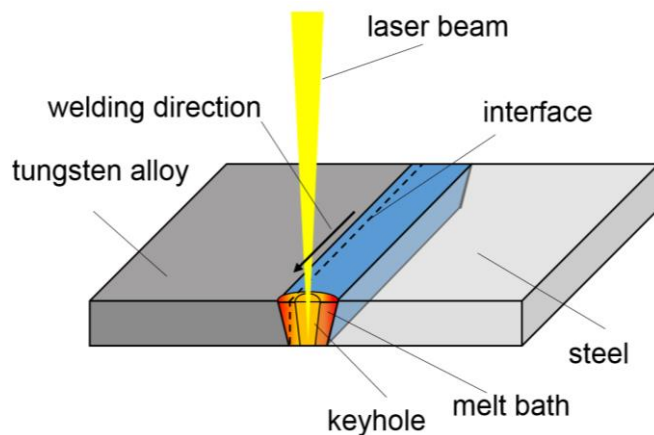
Butt-joint welding of steel to tungsten alloy
